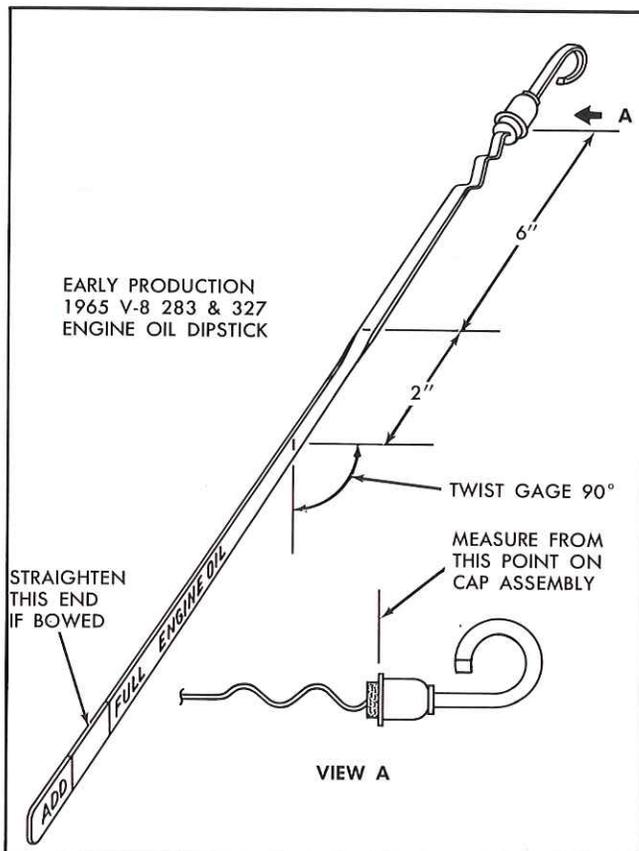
V-8 (283 or 327 cu. in.) Engine Dip Stick Modification
